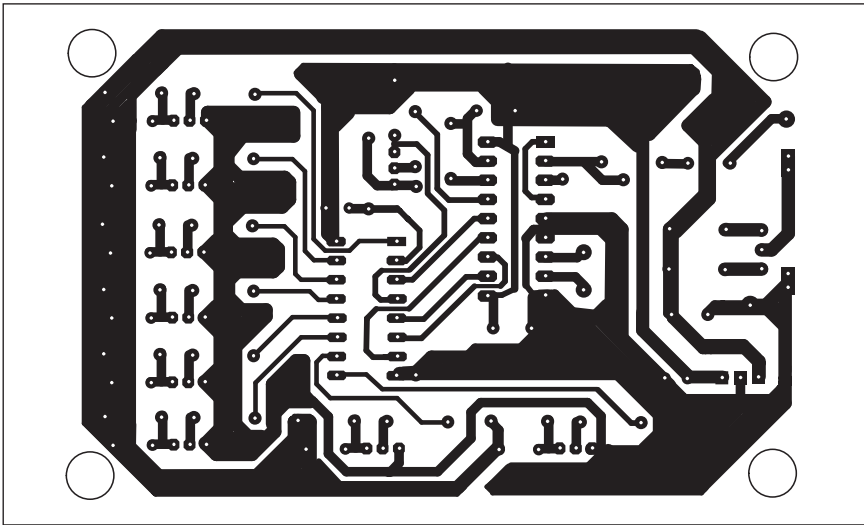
Actual-size, single-side PCB layout for the decoder circuit
